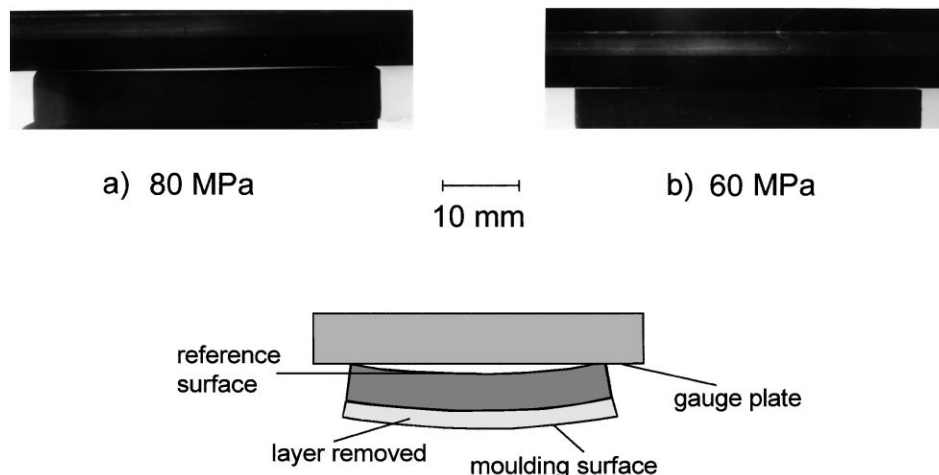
Photographs of bars after layer removal; (a) conventional moulding and (b) insulated sprue moulding. Inset defines the surfaces.
